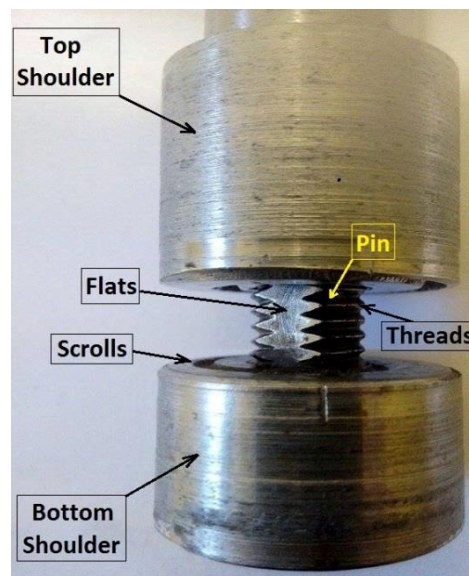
The bobbin-tool used for the Al-Cu welding trial.
